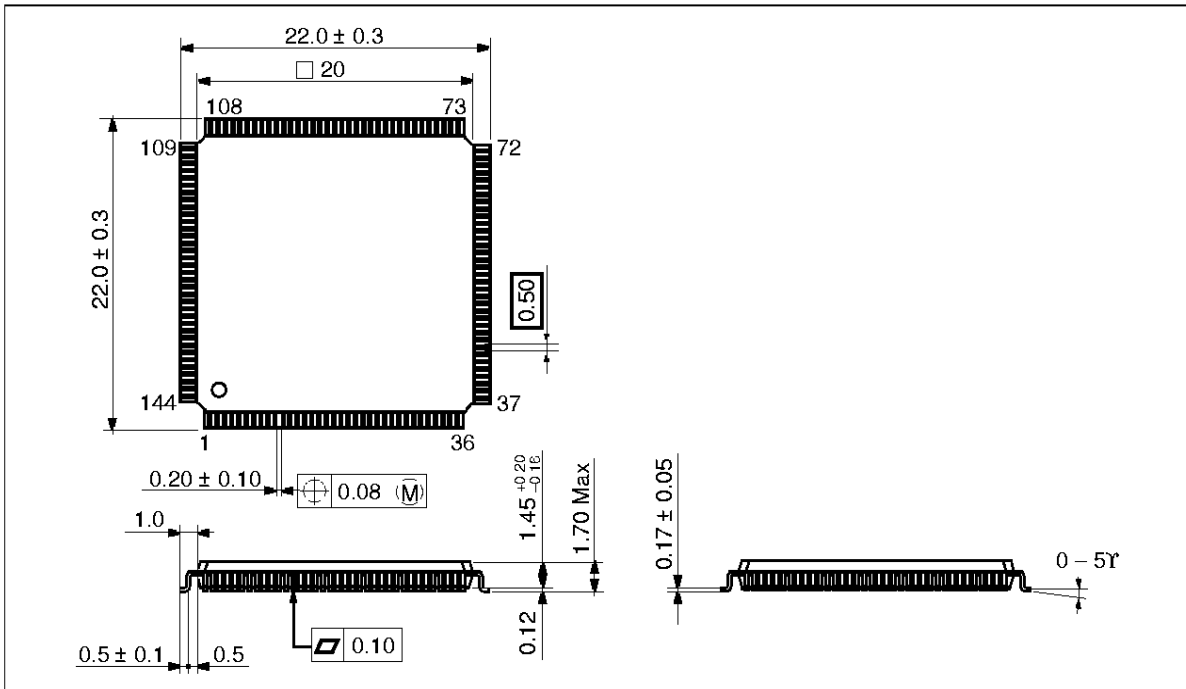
SH7041/43 Package Dimensions (QFP-144)
